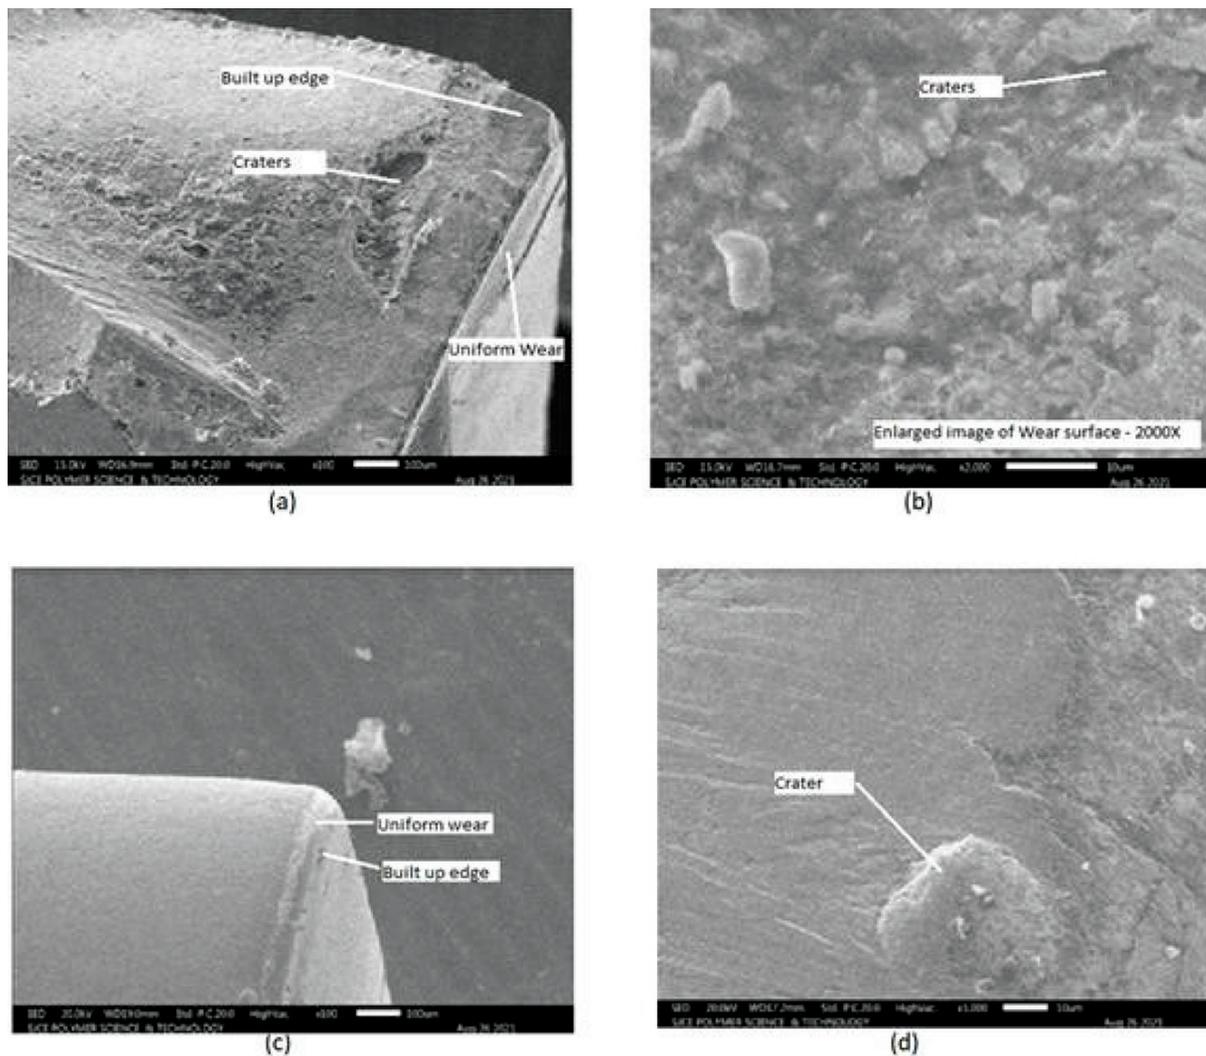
SEM image of tool wear surface (a): Uncoated tool insert at DOC0.5mm and cutting speed of 11.10m/min. (b): Uncoated tool insert at DOC 1mm and cutting speed of 19.47m/min. (c): Coated tool insert at DOC0.5 and cutting speed of 11.10m/min(d): Coated tool insert at DOC1mm and cutting speed of 19.47m/min
